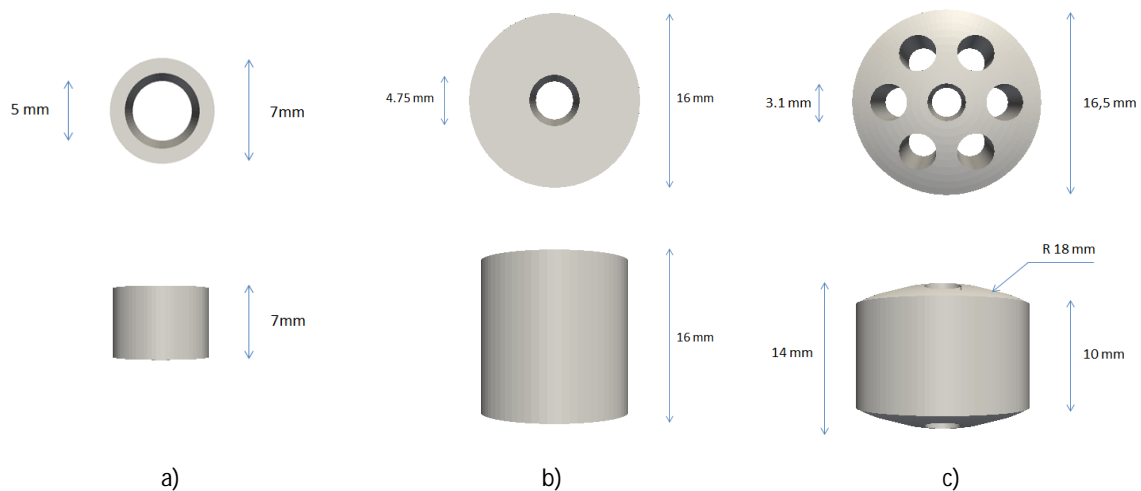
Pellet dimension – a) Ring (Large-Hole), b) ring (Small-Hole), c) "7 Holes"
